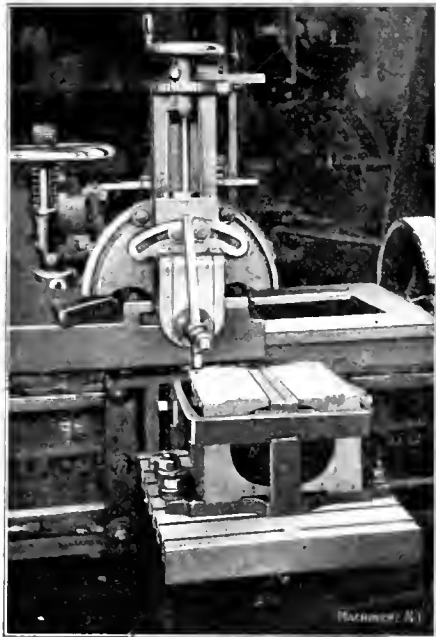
Machining the Sides of Truck Cellars with Traveling Head Shaper
